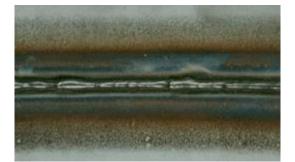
Unacceptable - Oxide layer present (grey colour) on and near weld; lack of proper backpurging
